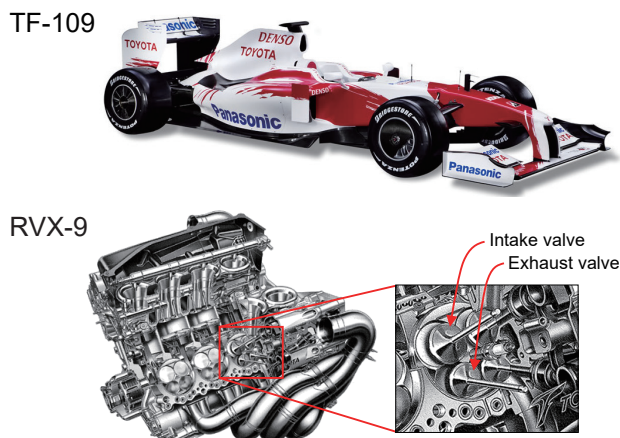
Appearance of Panasonic-Toyota Racing F1 car (TF-109) and cutaway view of 2398 cc NA V8 engine (RVX-09).
